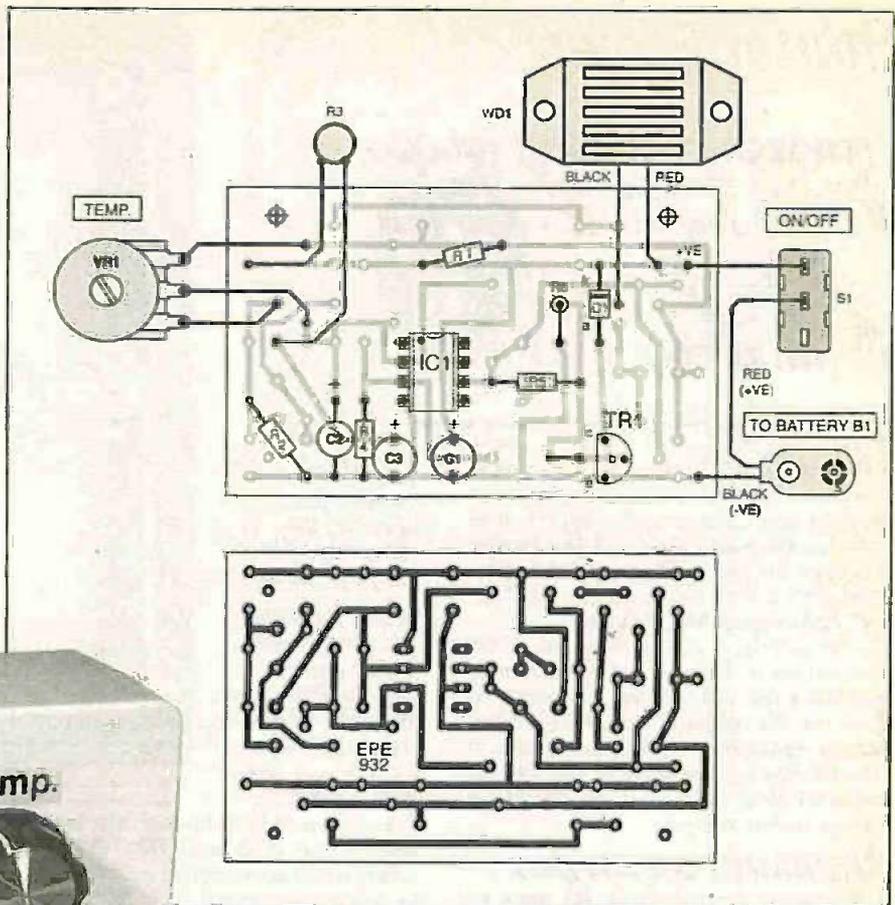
Multi-project printed circuit board component layout, inter-wiring and full-size copper foil master. Double-check layout as not all holes are used.
